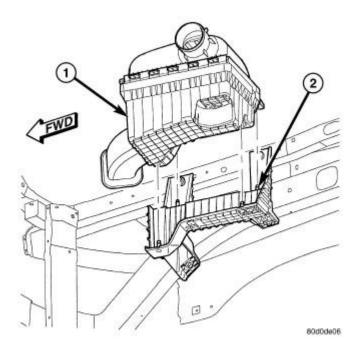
AIR CLEANER HOUSING Courtesy of CHRYSLER LLC
